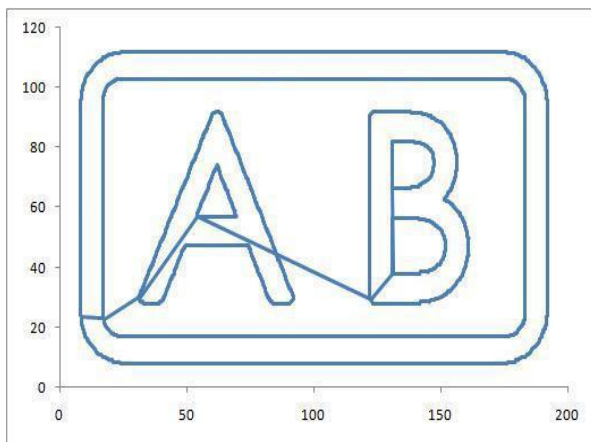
Pencil Cutting Tool Path for 0.5 Side Step
